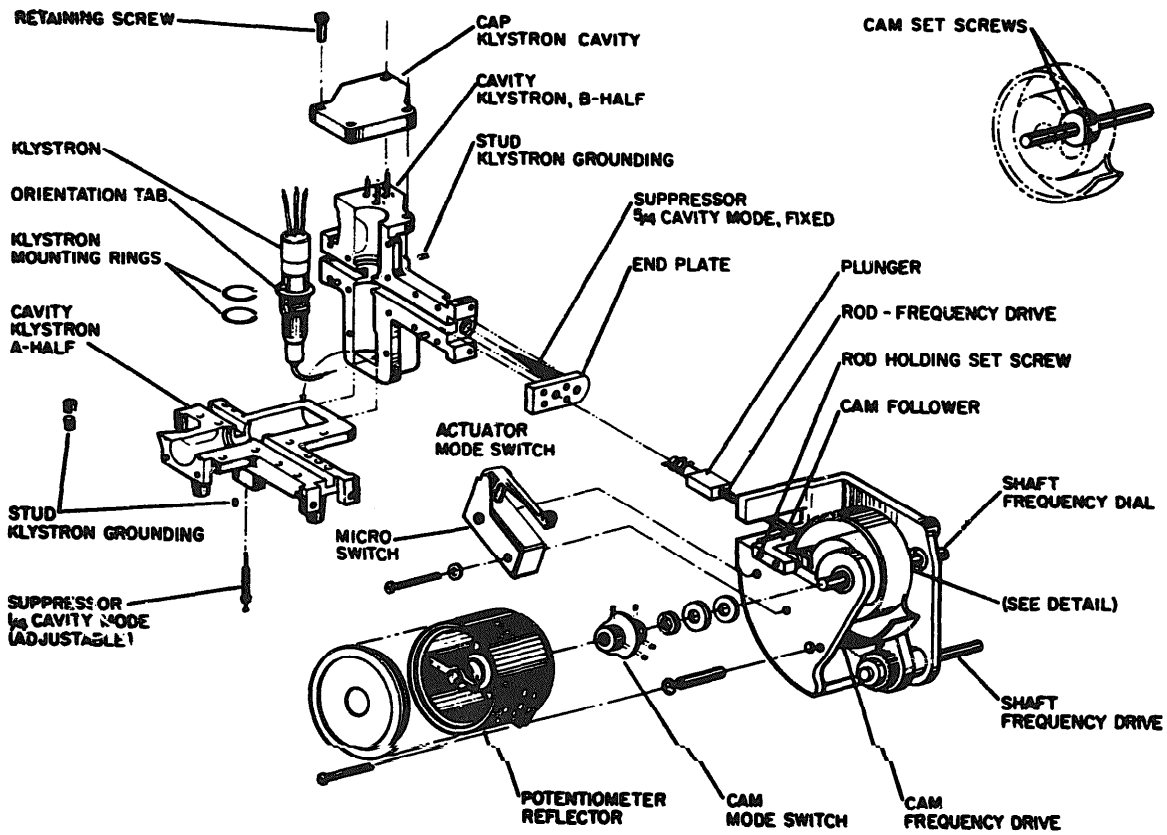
Exploded View of Klystron Cavity and Plunger Drive Mechanism
